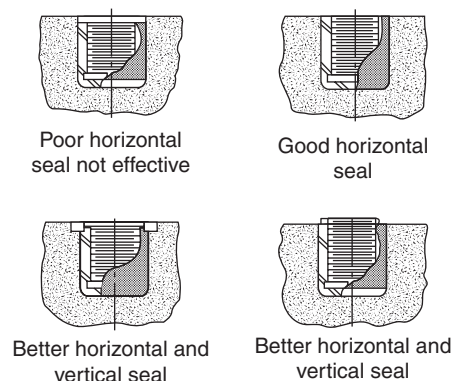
Male inserts should be so designed that they have a shoulder in order to seal out any plastic material that might be forced around the insert during the moulding operation.
